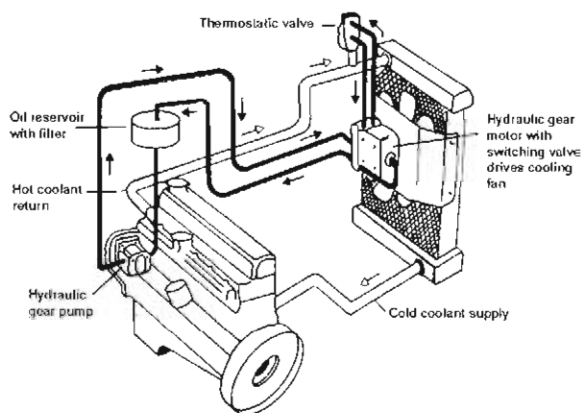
External gear pump - hydrostatic fan cooling drive
